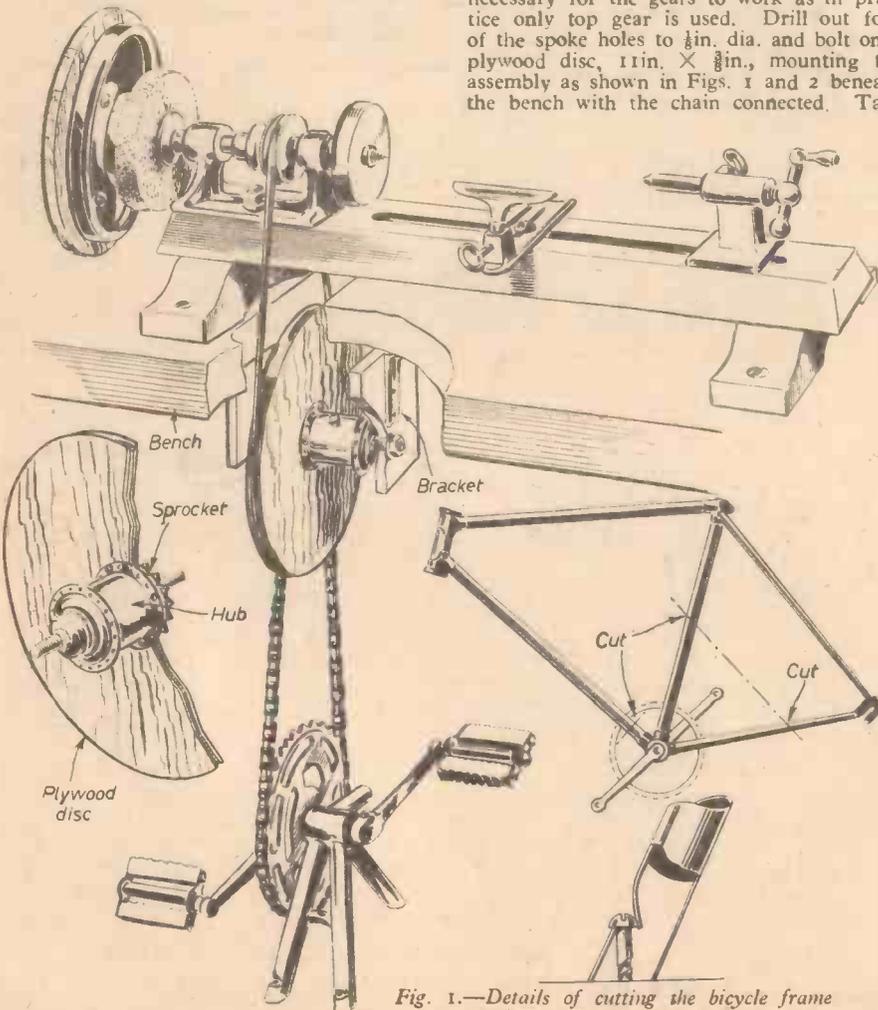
Details of cutting the bicycle frame and mounting the assembly.
